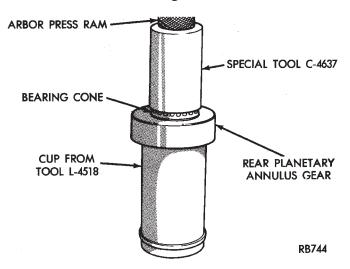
Install Rear Planetary Annulus Gear Bearing Cone
